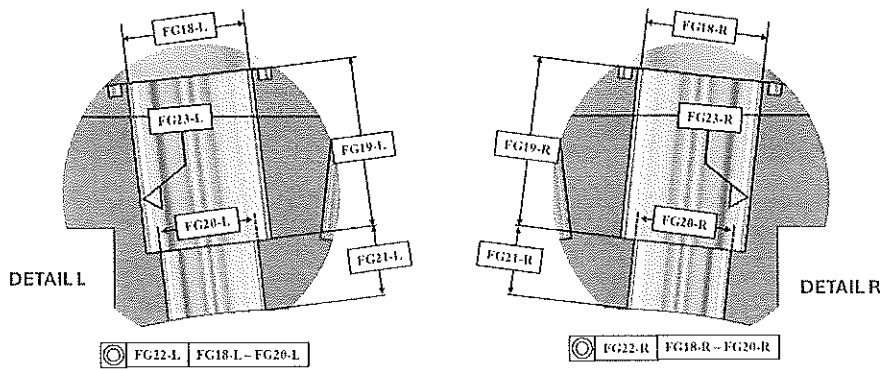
Details of dimensional inspection of the BPM Flange
